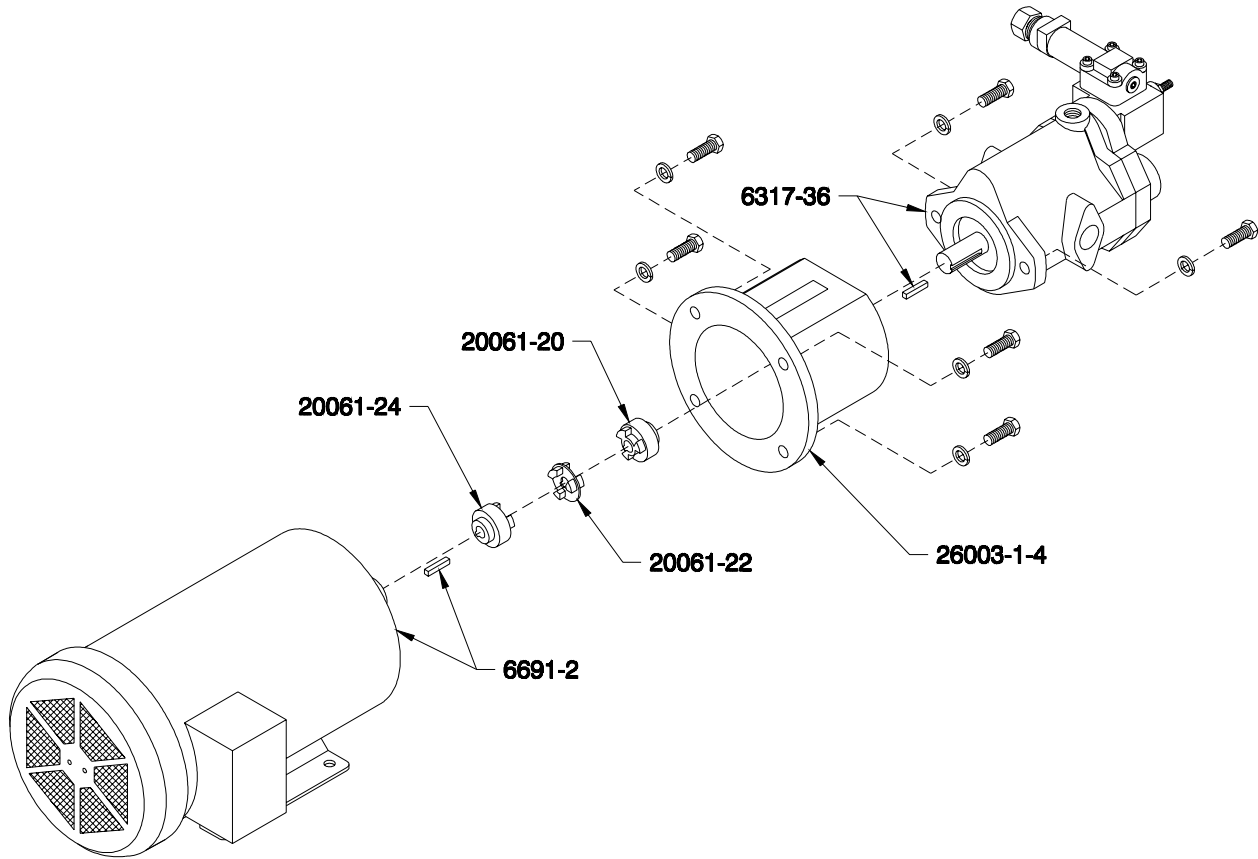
Motor Line Assembly, Three Phase, 230 Volt, (Part No. 18703-11), Exploded View
